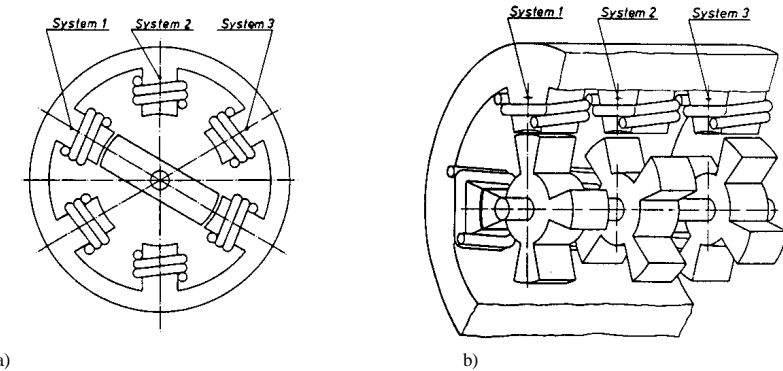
Design examples of the multi-phase stator winding of a VR-motor with m phases and Q_r rotor teeth
